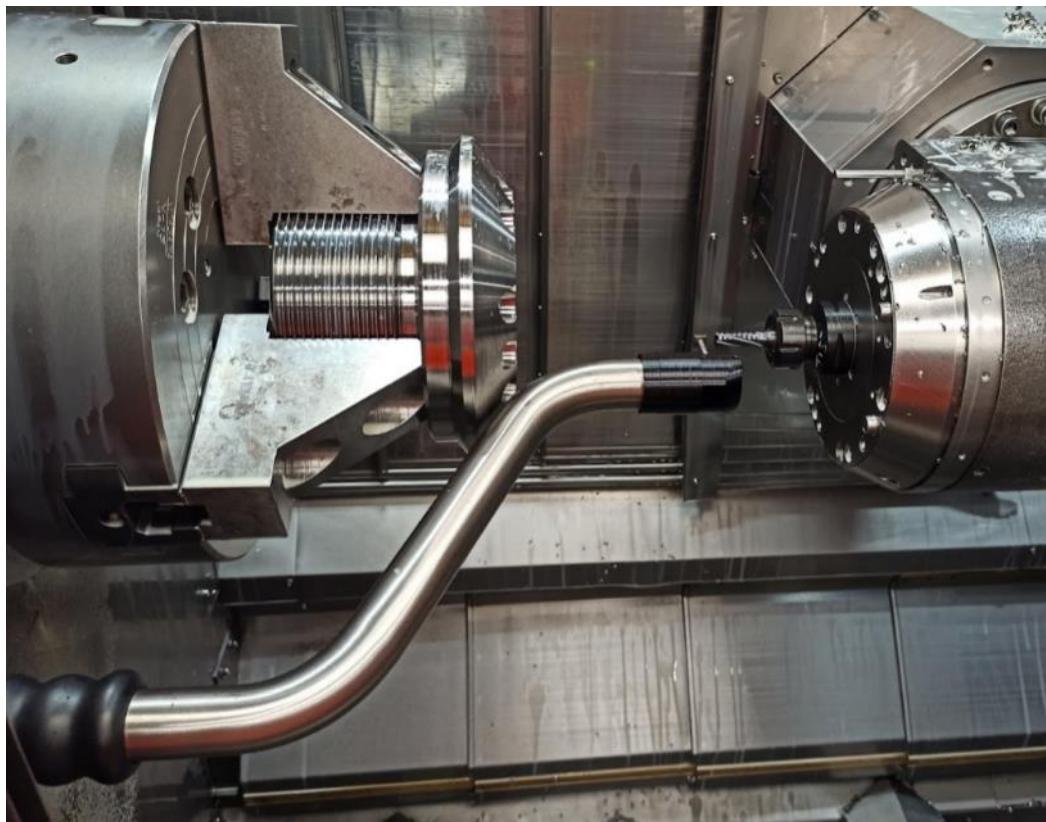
Renishaw HRPA tool setting arm in use during machining of a locking bolt.
